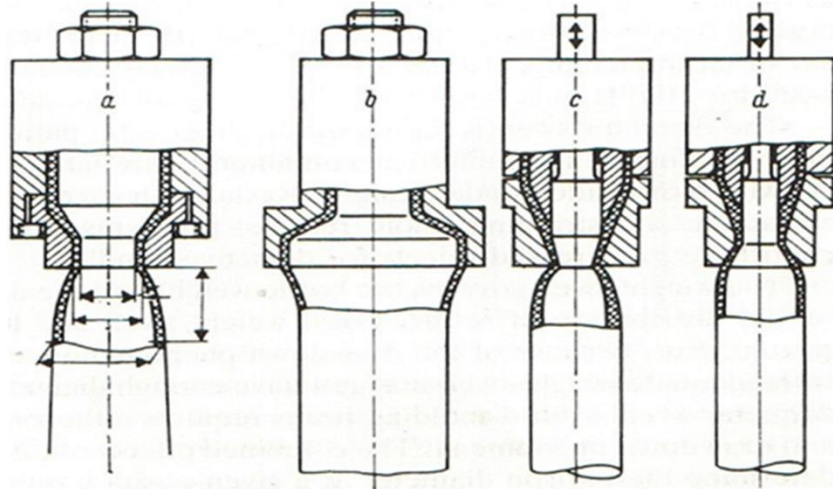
Various types of extrusion blow molding dies. From a Hoechst technical guide.
